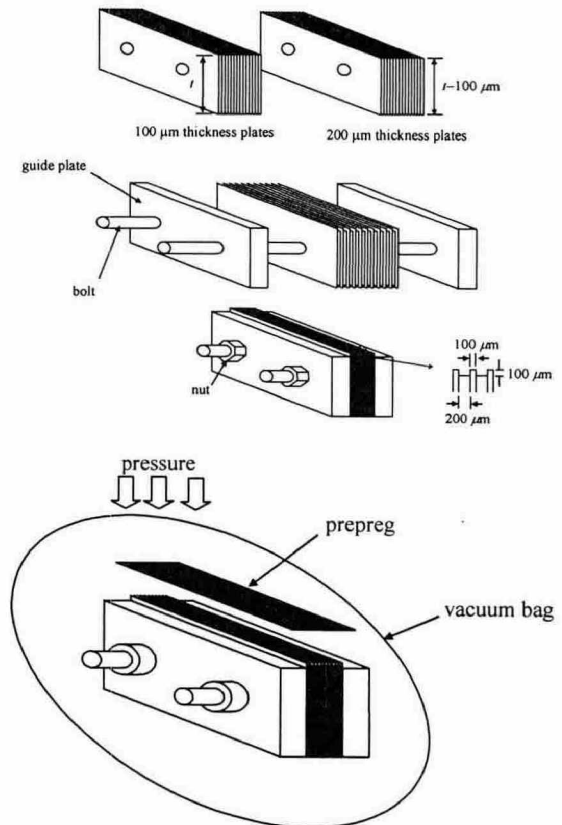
Fabricating process of the concave mold and specimens (patent pending); (a) mold fabrication method, (b) molding process for the composite with many small grooves.
